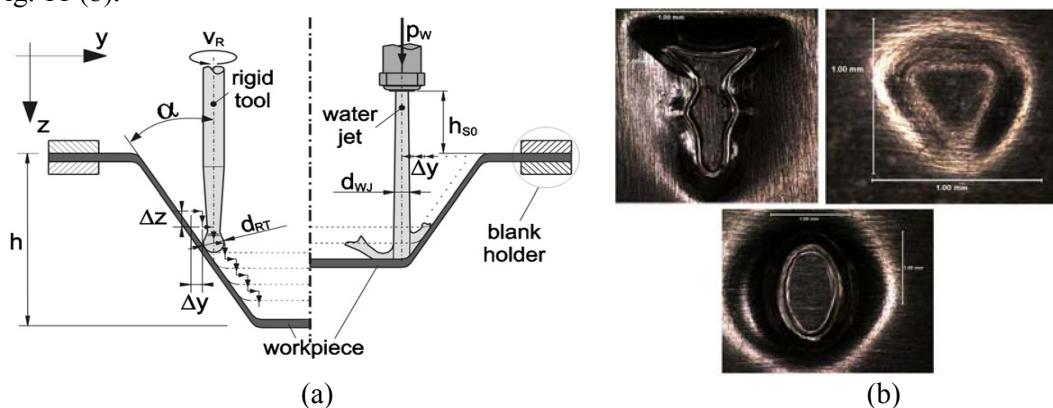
(a) Schematic of IF with incremental forming with single point rigid tool (left) and water-jet (right) [45], (b) Parts formed by IF at NU on a MORI-SEIKI 3 axis CNC machine
